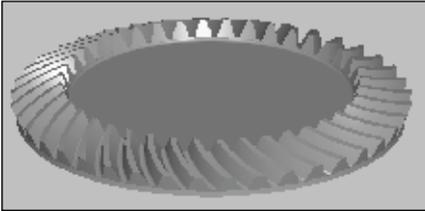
Tooth profile of gear modeled using 3-D CAD system.
